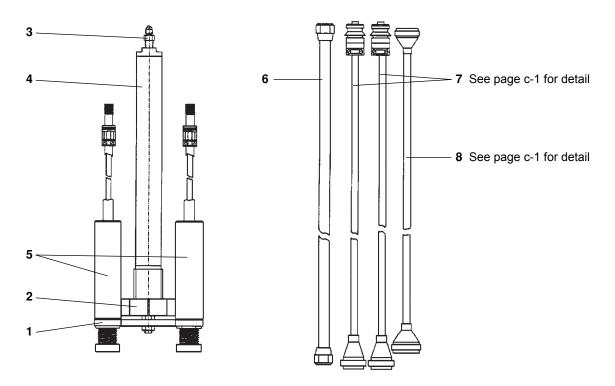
Inductive IHS Torch Mounting Assembly with Interconnecting Leads for IHS Assembly
